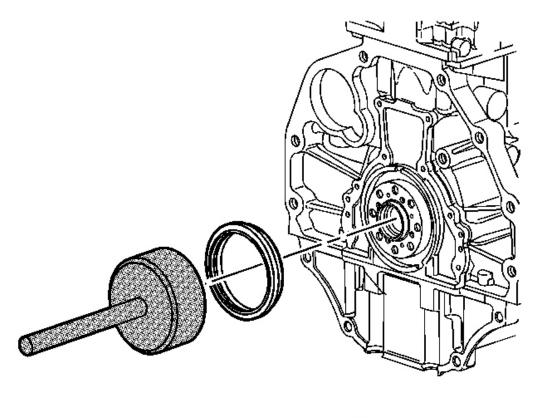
Installing Crankshaft Rear Oil Seal Using J 44227 Courtesy of GENERAL MOTORS CORP.
